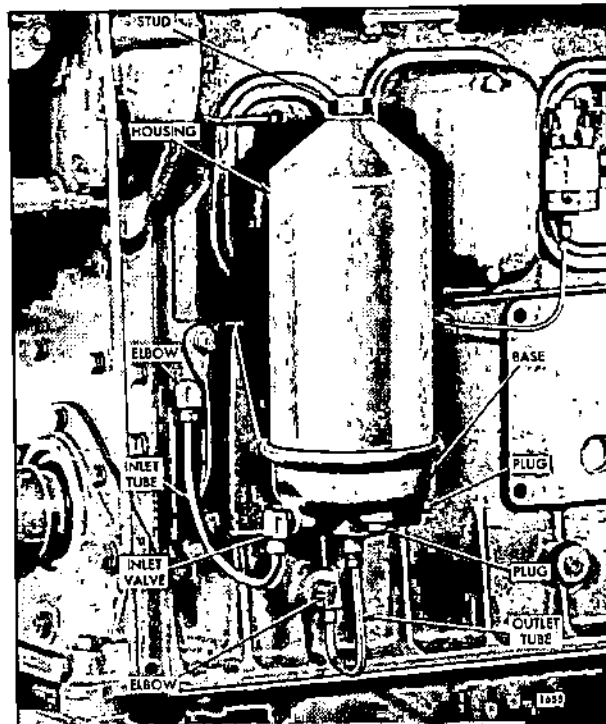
Typical Lubricating By-Pass Oil Filter Mounting
